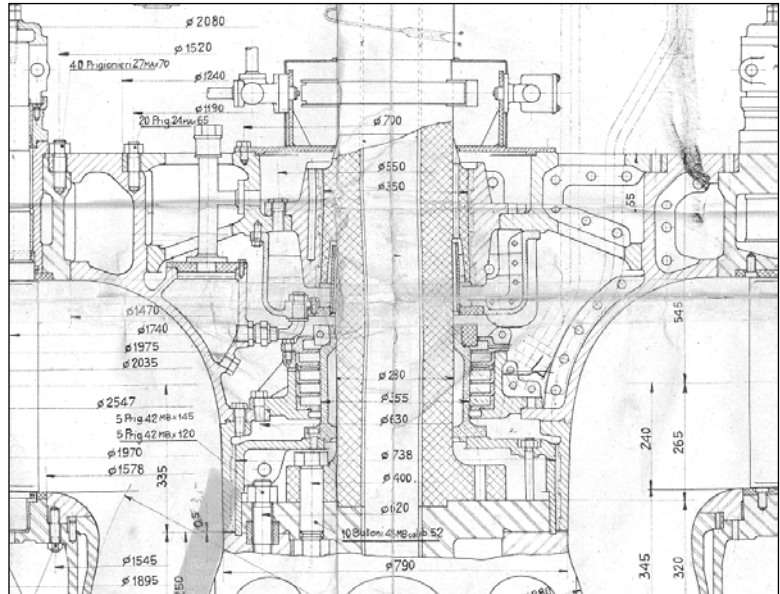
Original Bearing & Shaft Seal - Fabbriche
